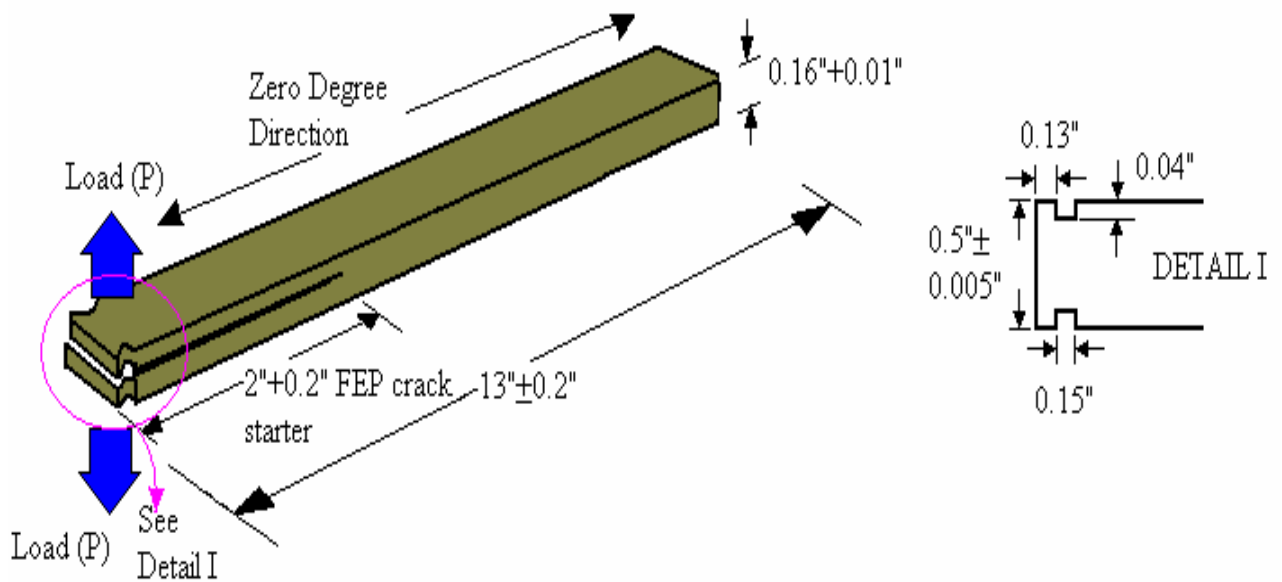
Double Cantilever Beam (DCB) specimen geometry
